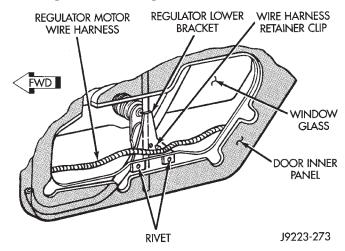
Power Regulator Lower Bracket Rivet Installation
